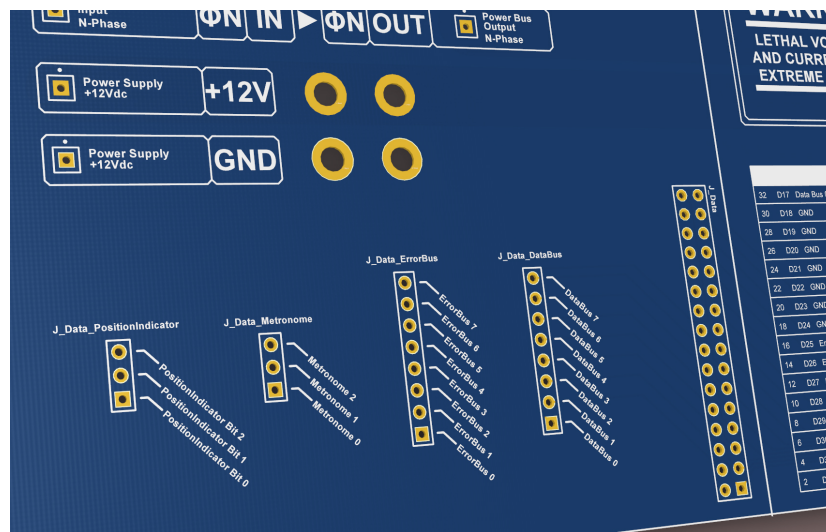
Detailed view of the debug module PCB indicating the explanatory markings. (*Rendering by Author*)
